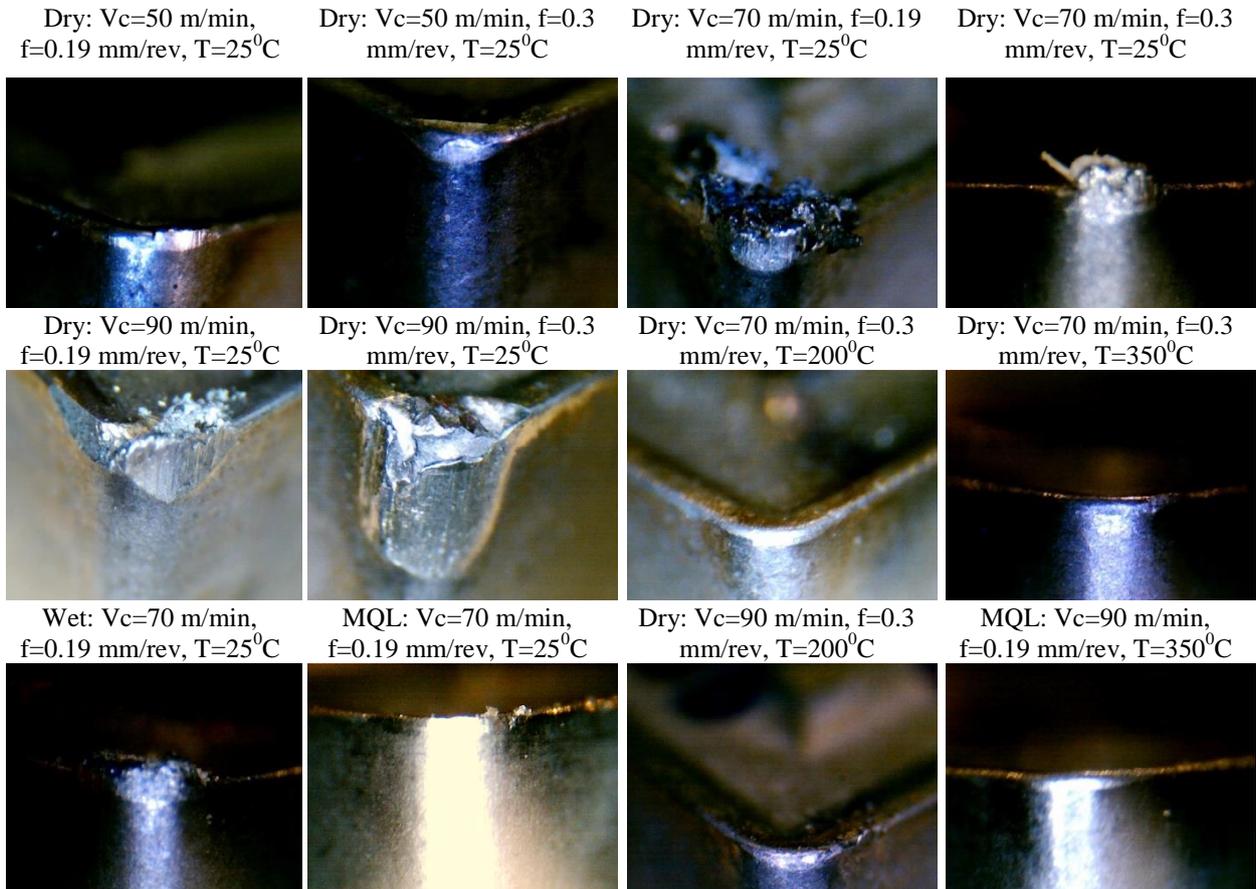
Tool wear micrographs at flank side of cutting tools under different machining conditions
